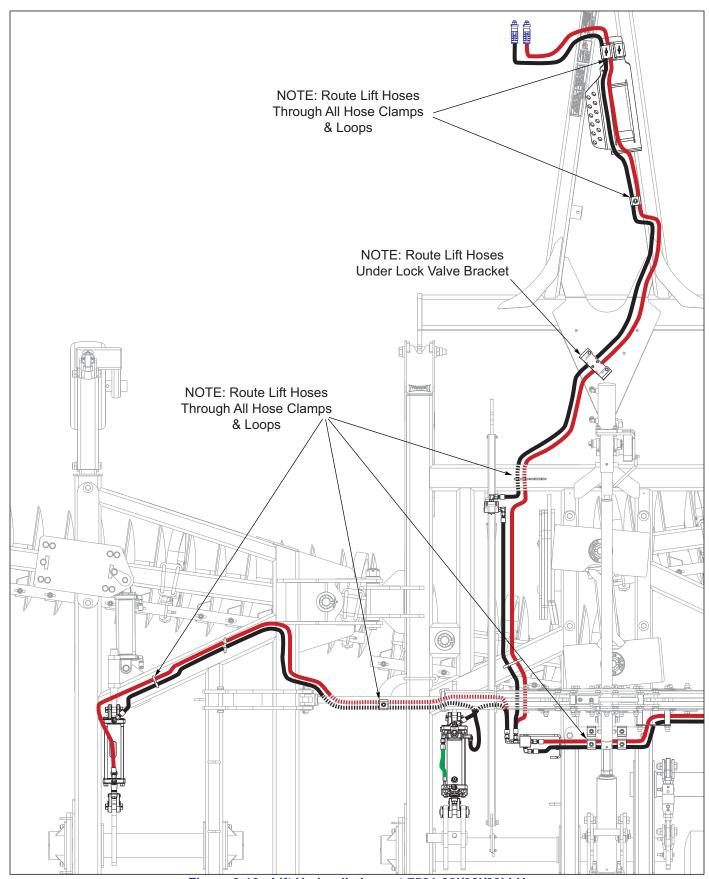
Lift Hydraulic Layout 7531-23'/26'/29' LH
